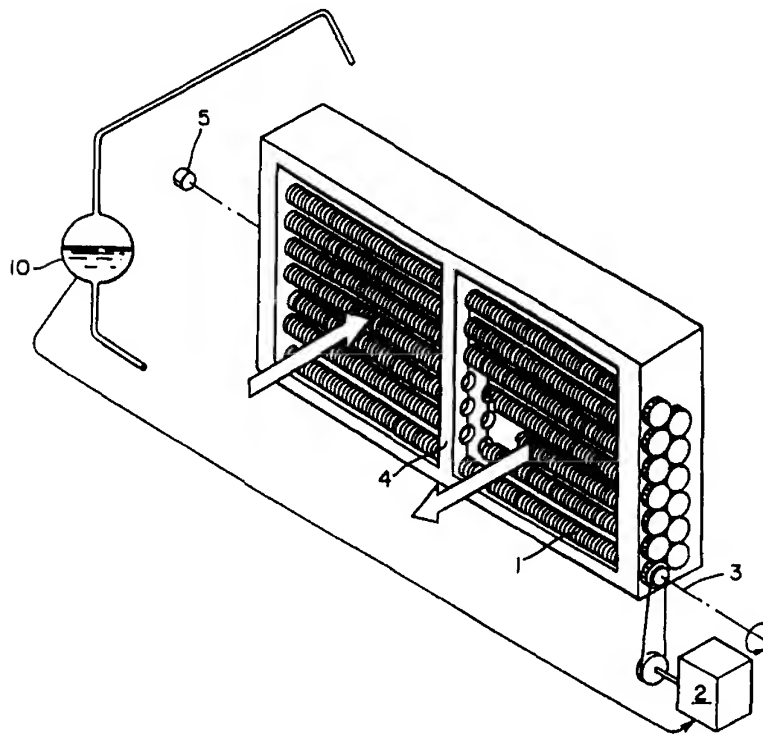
Heat exchanger with rotating finned tubes proposed by Deck [15]. Direction of gas flow shown by the arrows. Key: 1, finned heat transfer tube; 2, drive motor; 3, axis of rotation of a tube; 4, bulkhead that carries bearings that support the rotating tubes; 5, sonic transducer for vibrating tubes to remove fouling deposit; 10, pressure sending switch that starts the motor (2) when the pressure drop across the tube bank reaches a preset value. From Deck [15].
